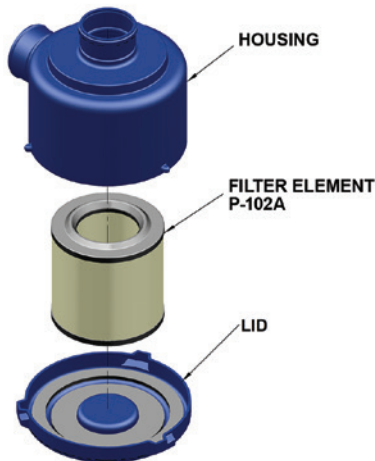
Intake Air Filter Assembly, IBC Part #SC-100A (Filter Element Alone is IBC Part #P-102A)
